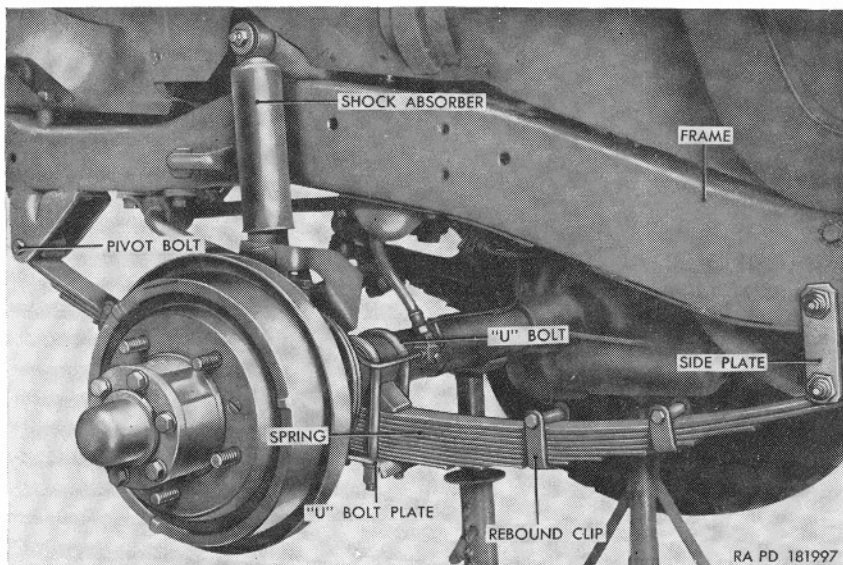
(Added) Front spring and shock absorber M170—installed.
